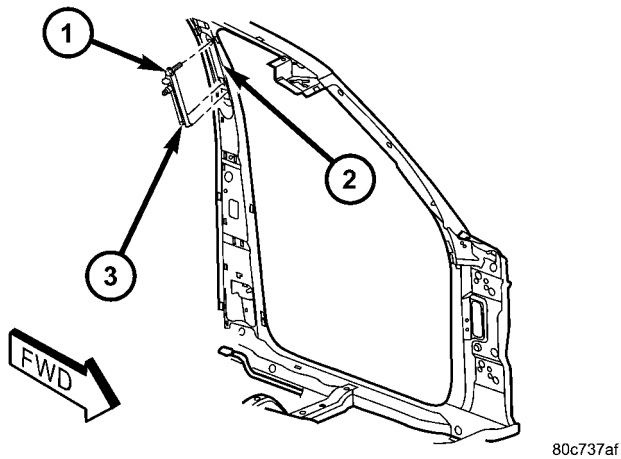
Seat Belt Turning Loop Adjuster Remove/Install
